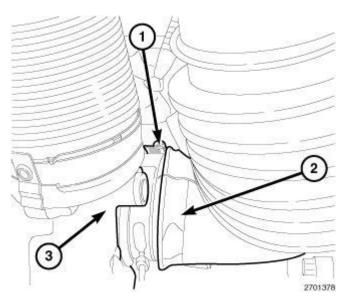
Air Cleaner Housing, Worm Clamp, Air Cleaner Outlet Tube, MAF Sensor & IAT Sensor Courtesy of CHRYSLER LLC
